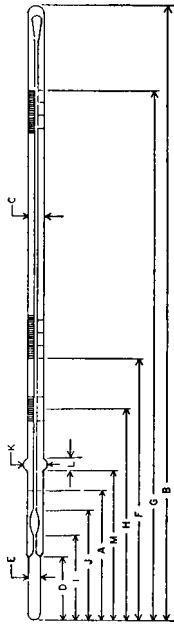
Test Gage for Checking Enlargements on Thermometers
